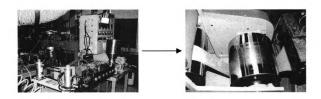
KLB-100 Single-screw Extruder (left) and Chill-roll (right)
